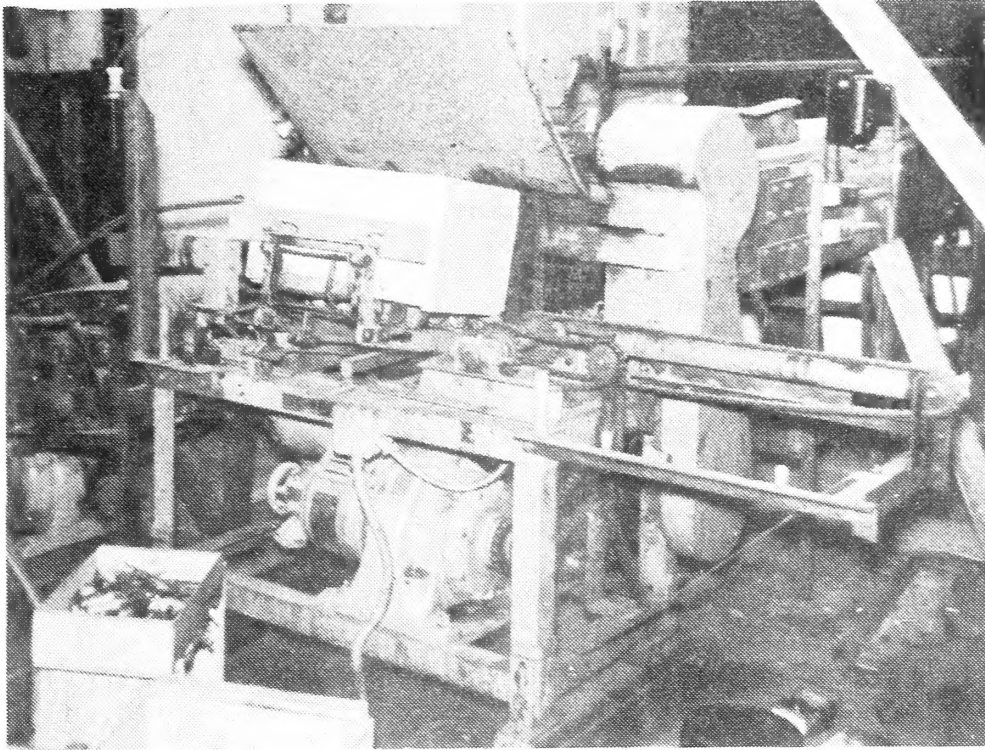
Mechanical dumper with apron handling boxes from a conveyor line.
